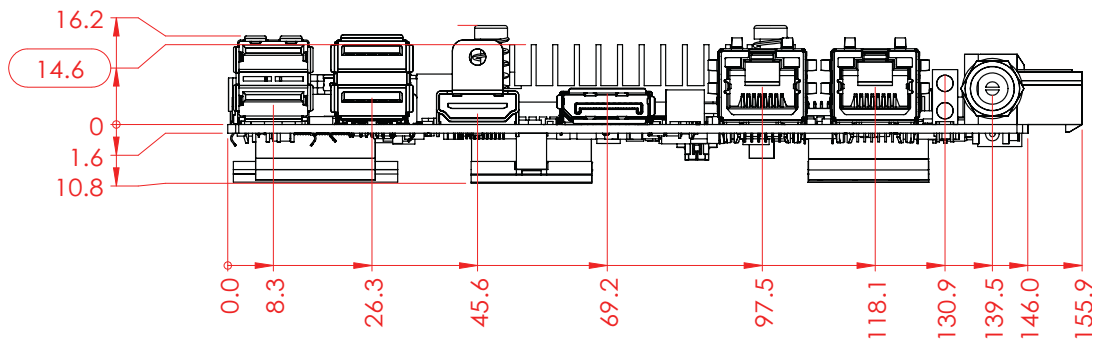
MIO-5154 Mechanical Drawing with 6W CPU Heatsink (Coastline)
